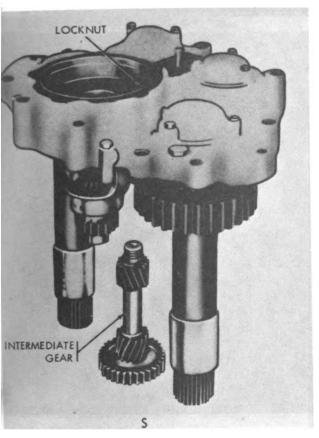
Traversing gearbox disassembly or assembly (7 of 15).
